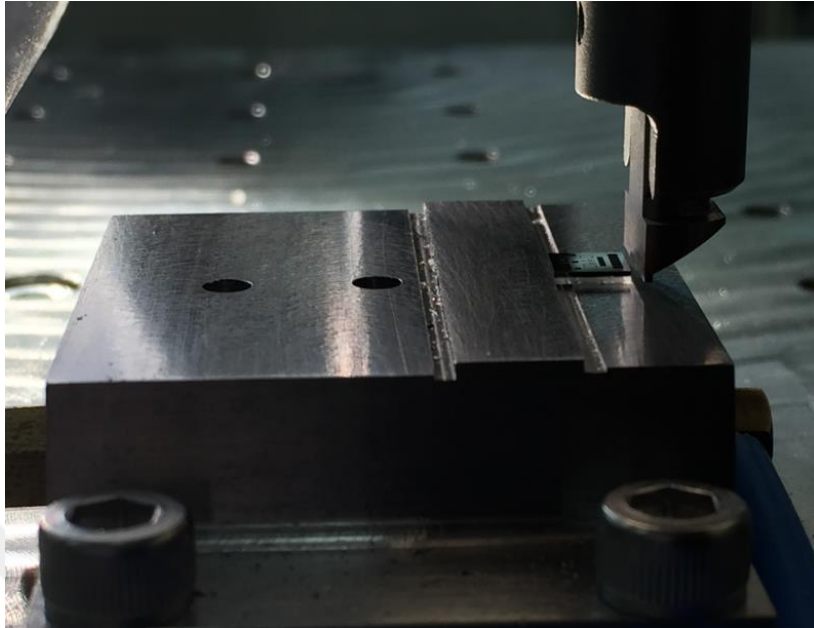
Photo of the holder specially designed and manufactured for dies, die and shear tip.
